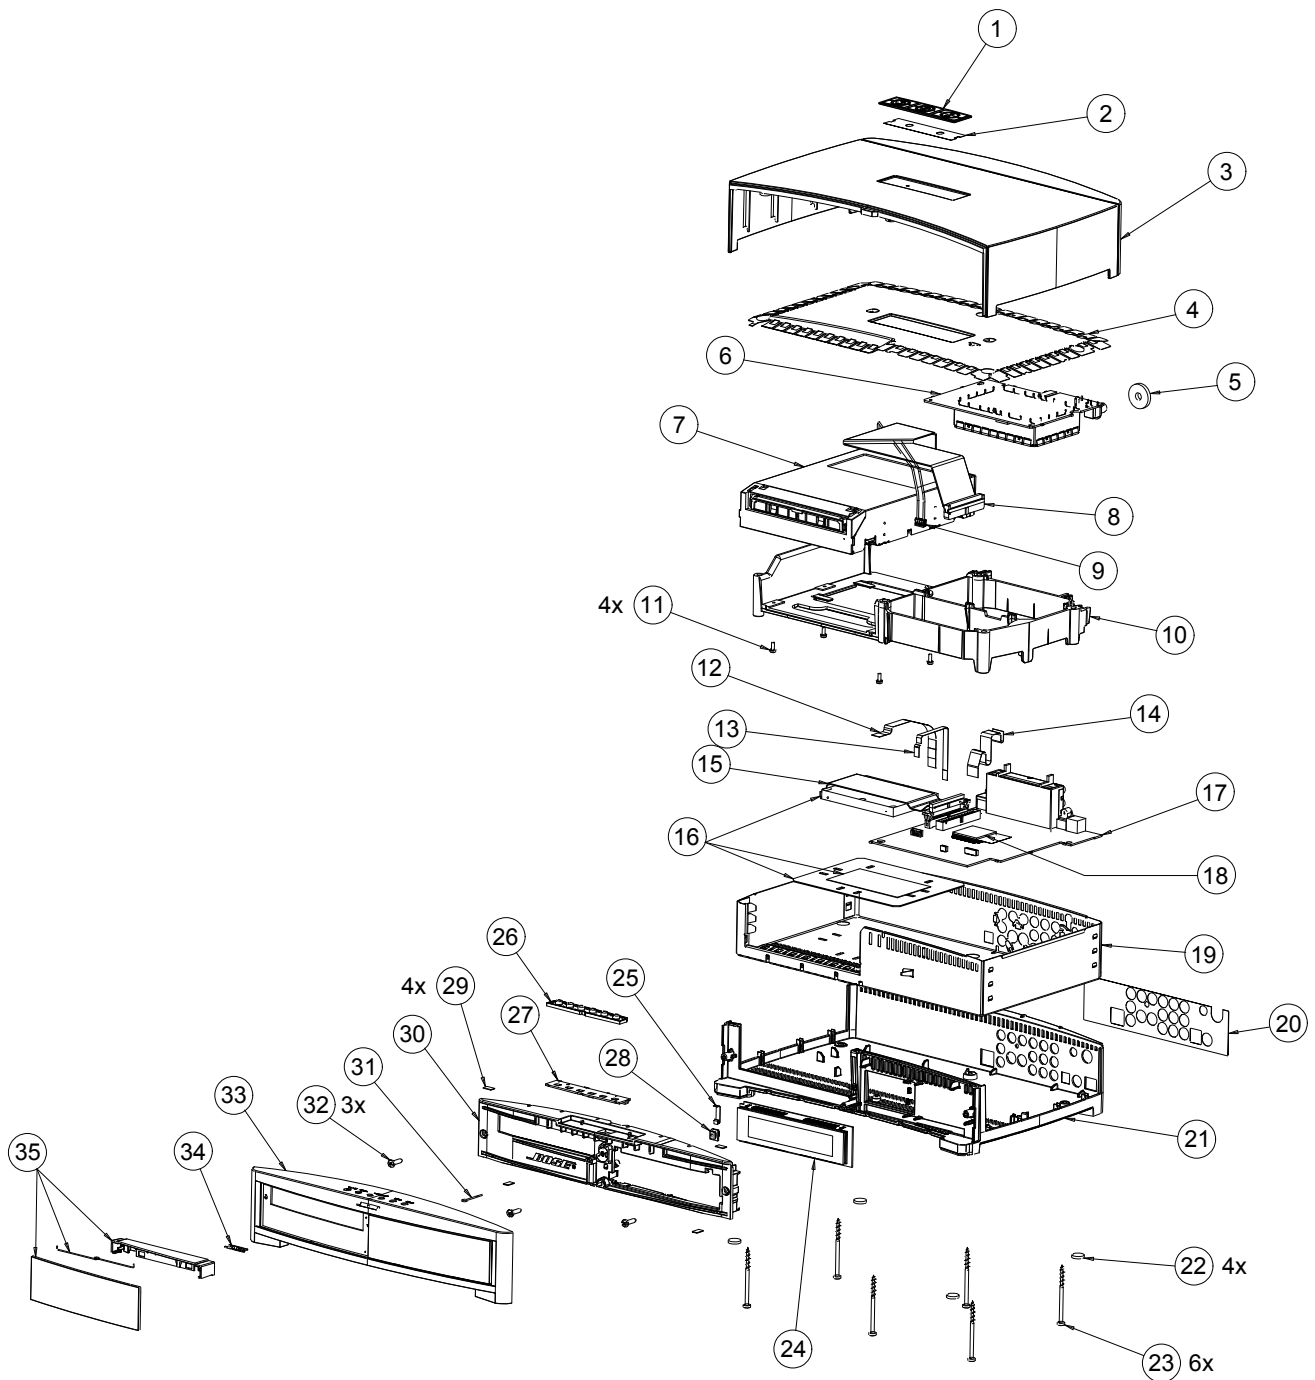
3•2•1GSX Series II Premium Console Exploded View
